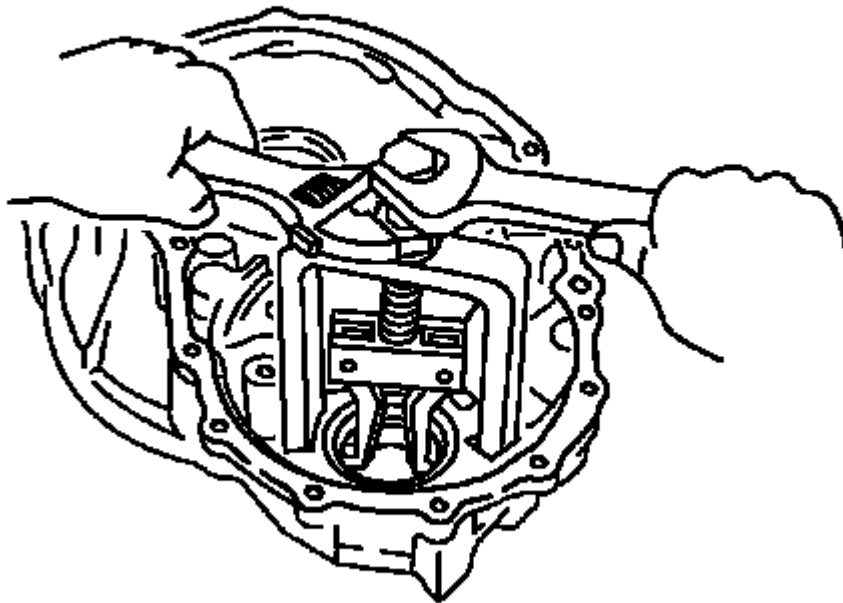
Removing Side Bearing Outer Race & Transaxle Housing Using A Puller
